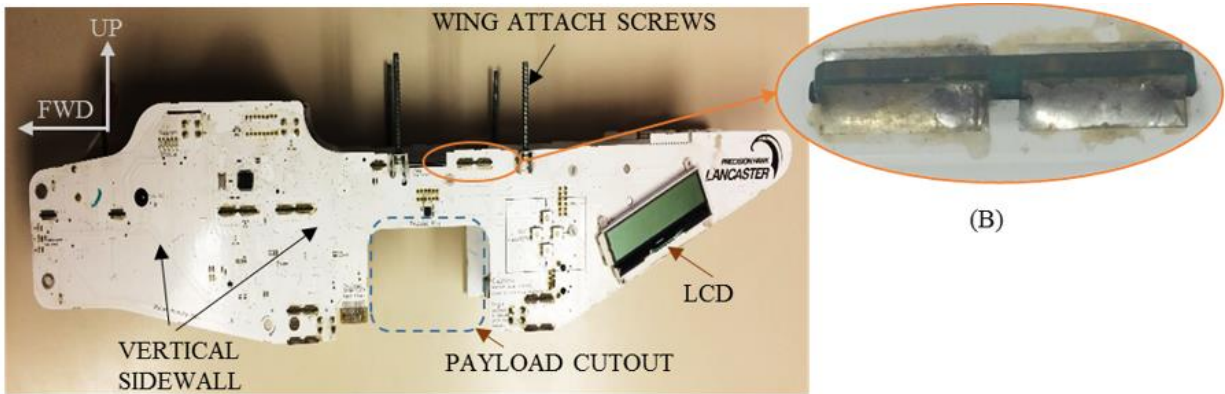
(A) Fixed-wing UAS fuselage subassembly and (B) Solder joint connecting transverse PCBs to the sidewalls
